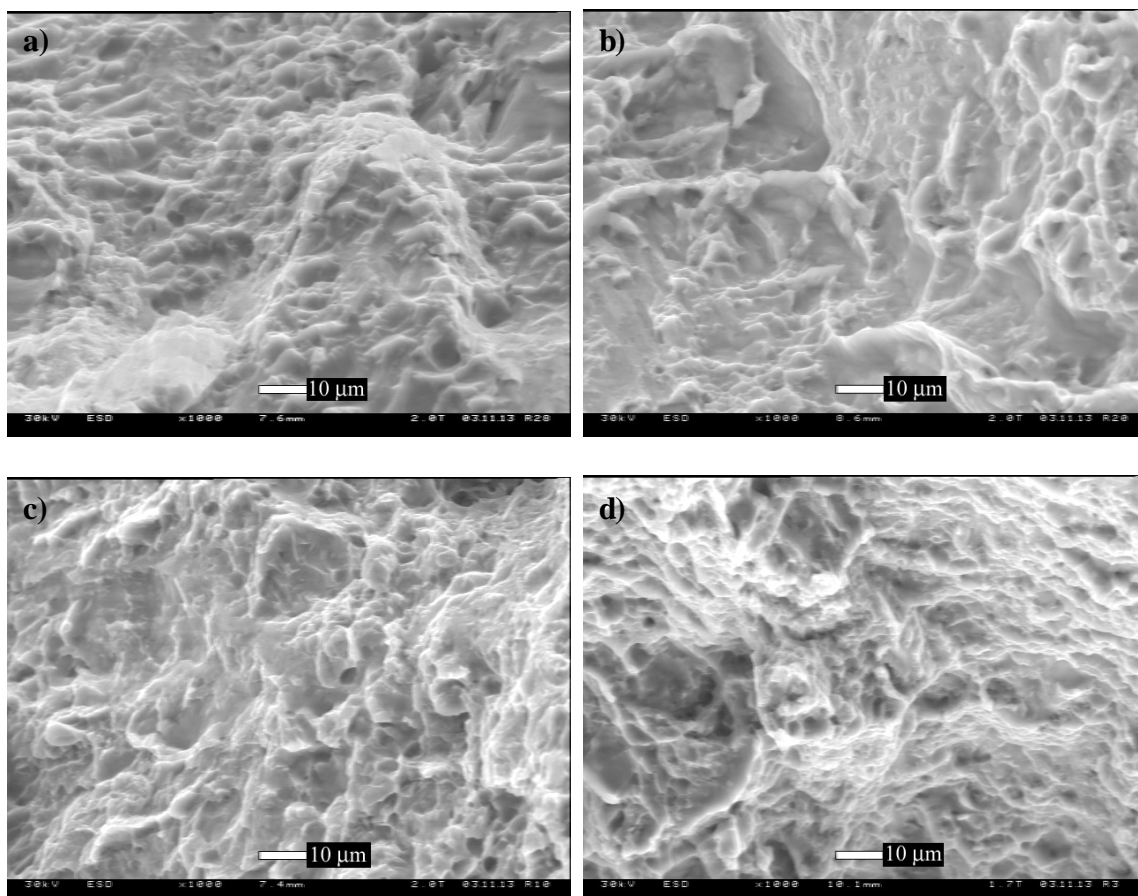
Fracture surfaces of tensile specimens, 1000x. (a) Base metal, (b) matching filler metal weld, (c) modified 50 ppm Y filler metal weld, and (d) modified 200 ppm Y metal.
